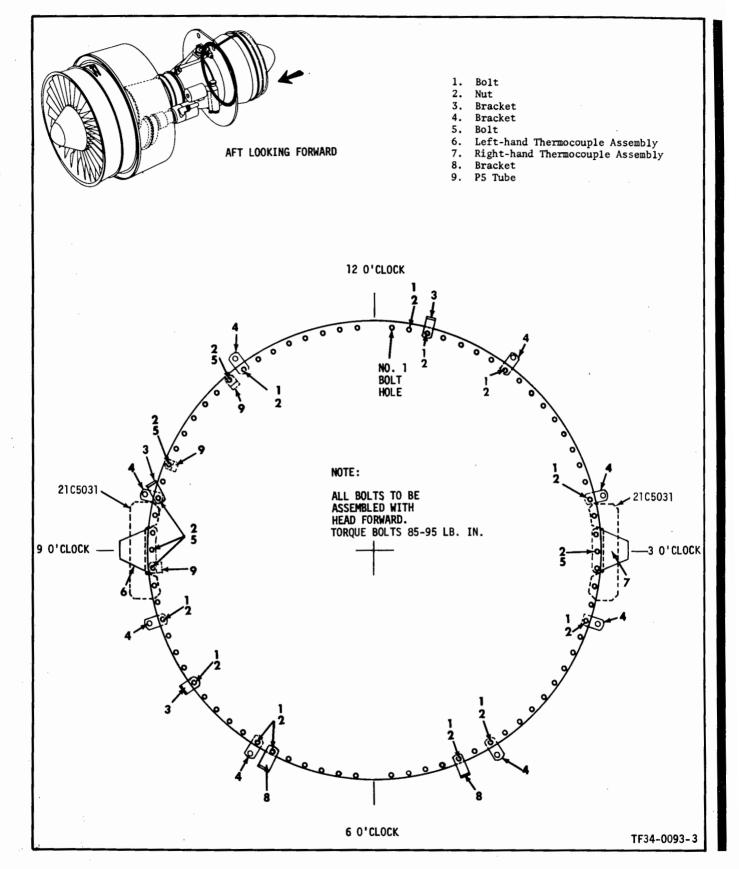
Bolting Diagram - Low-Pressure Turbine Stator-to-Transition Casing
